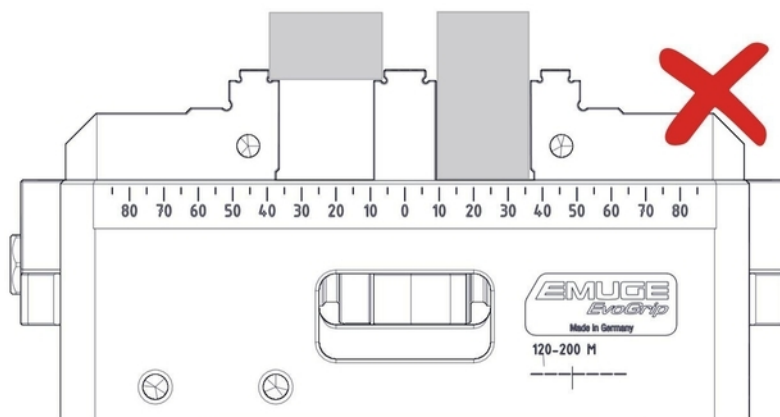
Schematic illustration: Incorrect clamping of 2 workpieces
